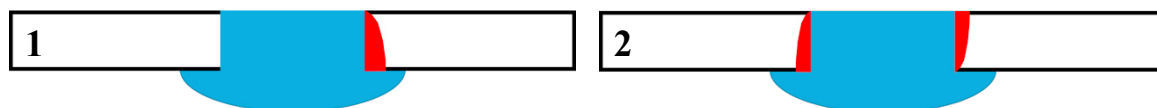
Schematic drawing of the crack locations and geometry in specimen 1 and 2.
